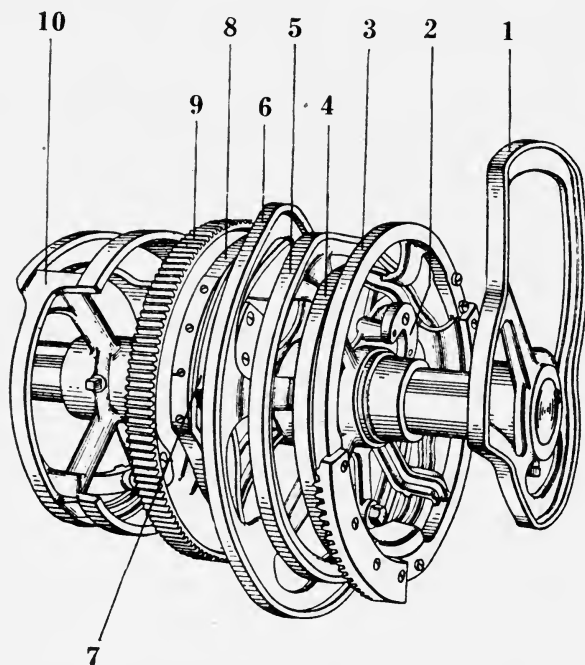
The Main Cams and Cam Shaft. No. 1 is the first elevator cam, No. 2 the distributor shifter cam, No. 3 the mold turning cam, No. 4 the vise closing cam, No. 5 the justification cam, No. 6 the second-elevator cam, No. 7 the pot pump cam, No. 8 the pot cam, No. 9 the mold cam and driving gear, No. 10 the delivery and elevator transfer cam.
